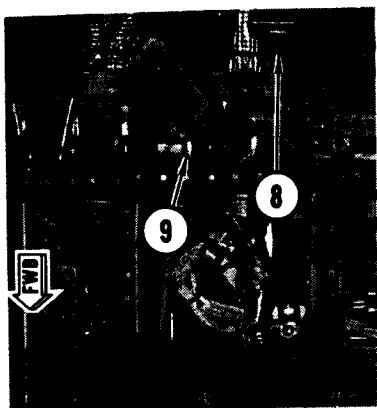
Wing Center Section Removal and Installation (Sheet 3)
